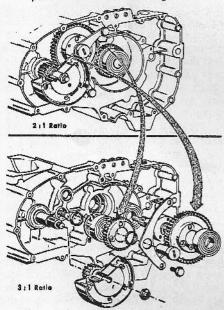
View showing installation of gears for 2:1 ratio and 3:1 ratio reduction.
